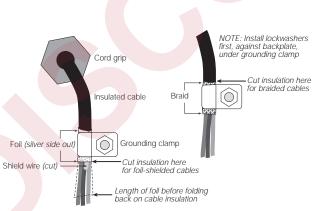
Grounding Clamp Attachment for Foil-Shielded and Braided Cabling
